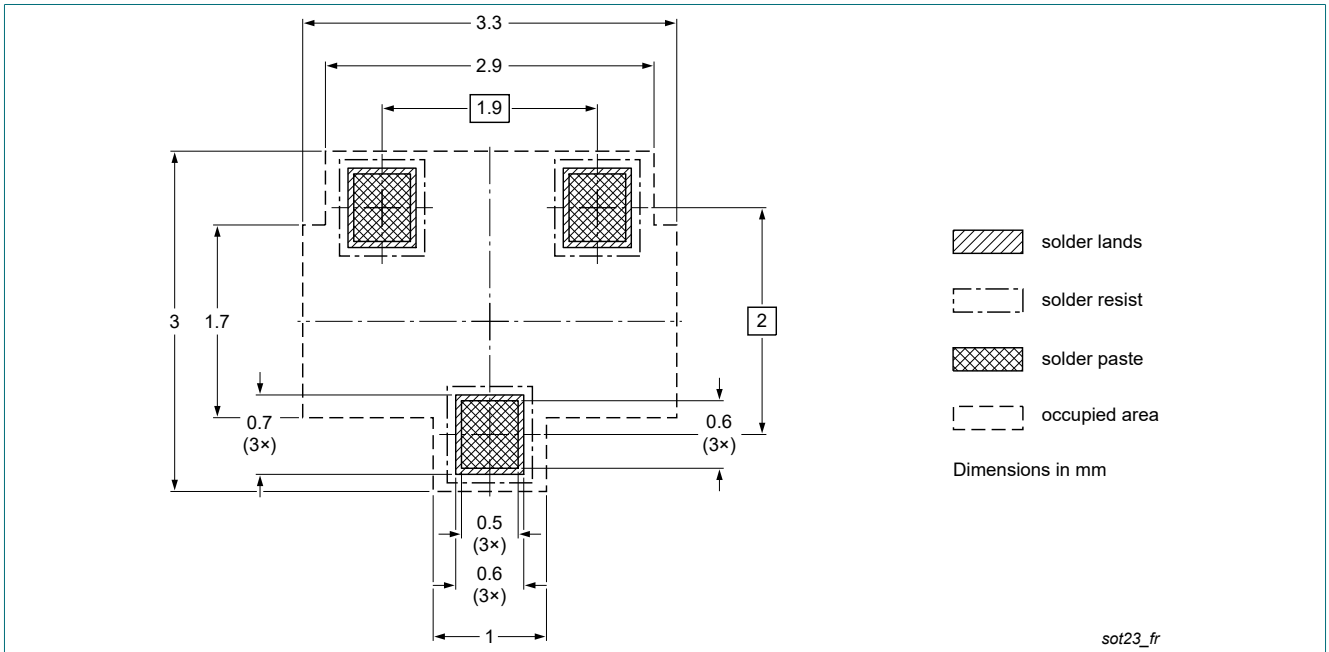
Reflow soldering footprint for SOT23 (TO-236AB)
